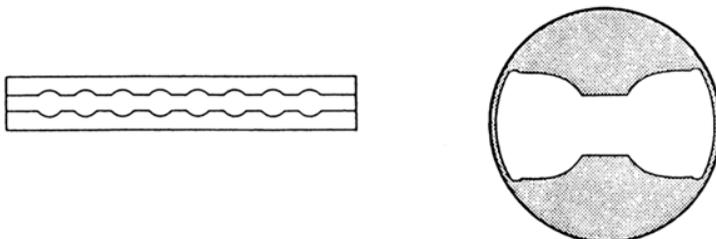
Example of tie-down attachment points on track and anchor plate
